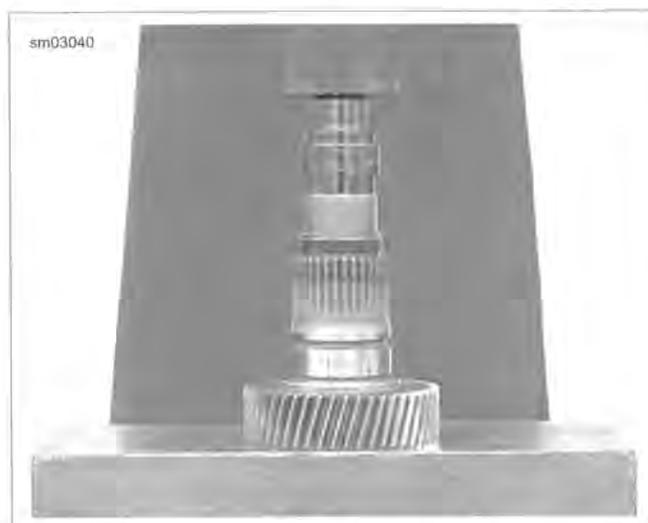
Installing Clutch Side Needle Bearing in Main Drive Gear
